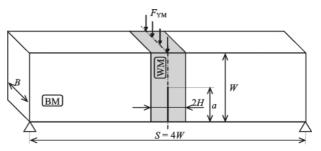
Configuration of the single-edged fracture-toughness specimen subjected to bending SE (B)
